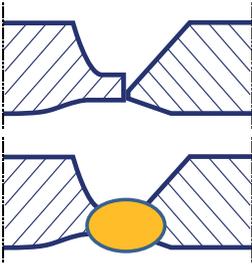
Weld bead in plate position (on top) and in overhead position (bottom)
